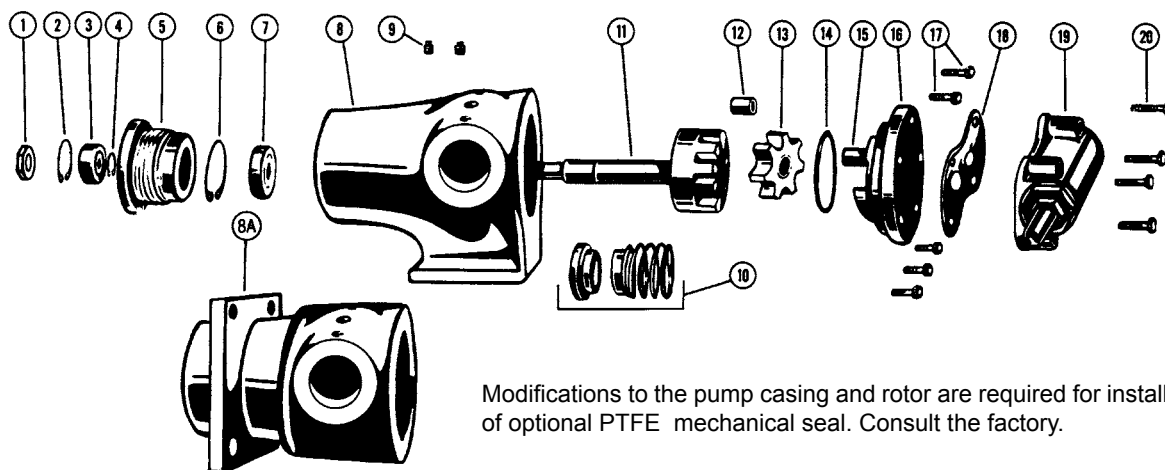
EXPLODED VIEW FOR MODELS GG, HJ AND HL 4195 AND 495
